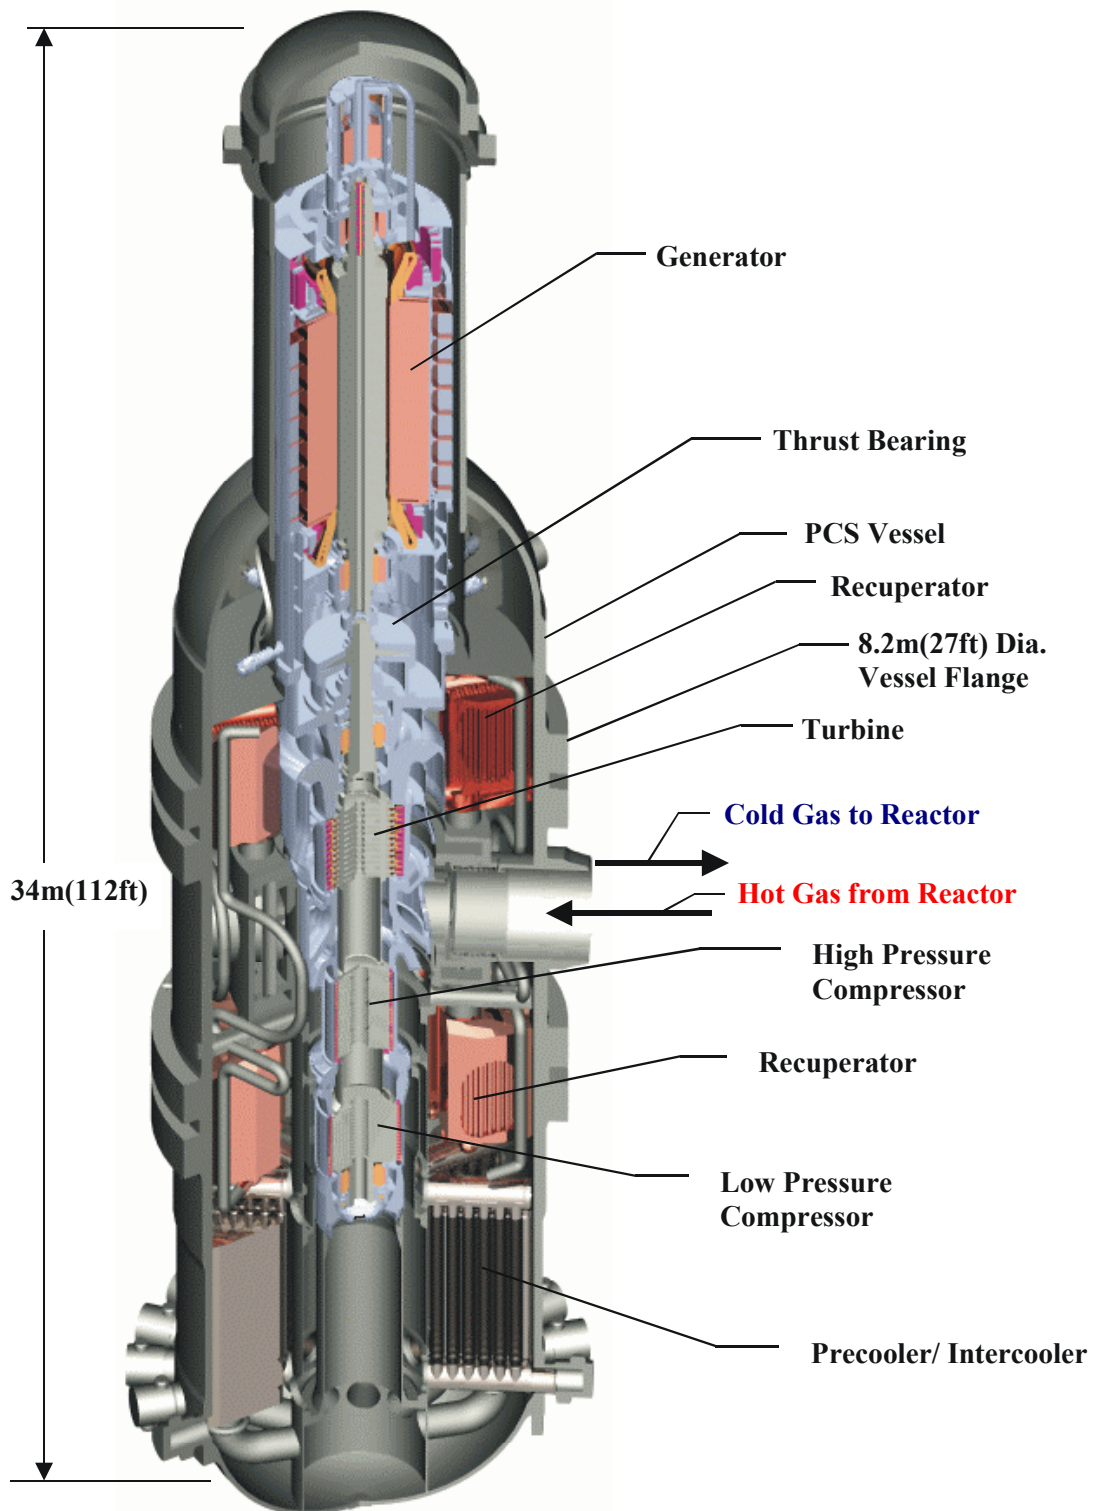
GT-MHR power conversion unit cutaway showing the turbomachinery: turbine, compressors, recuperators, intercooler/precooler, and generator.
